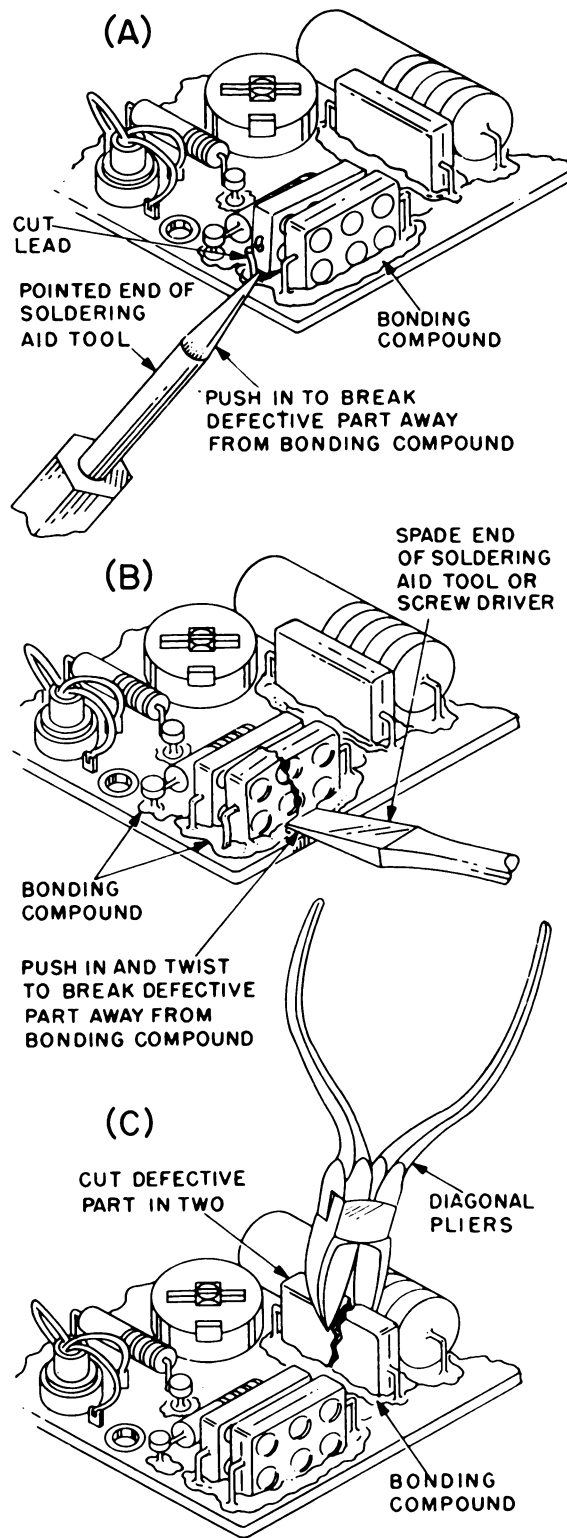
Removing a defective part from bonding compound.
